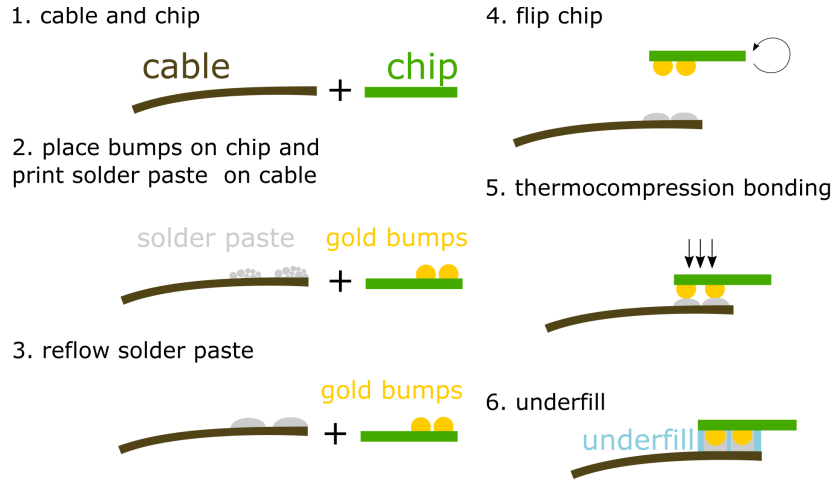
Schematic drawing of the individual process steps in the gold stud bump–solder paste interconnection technology.
